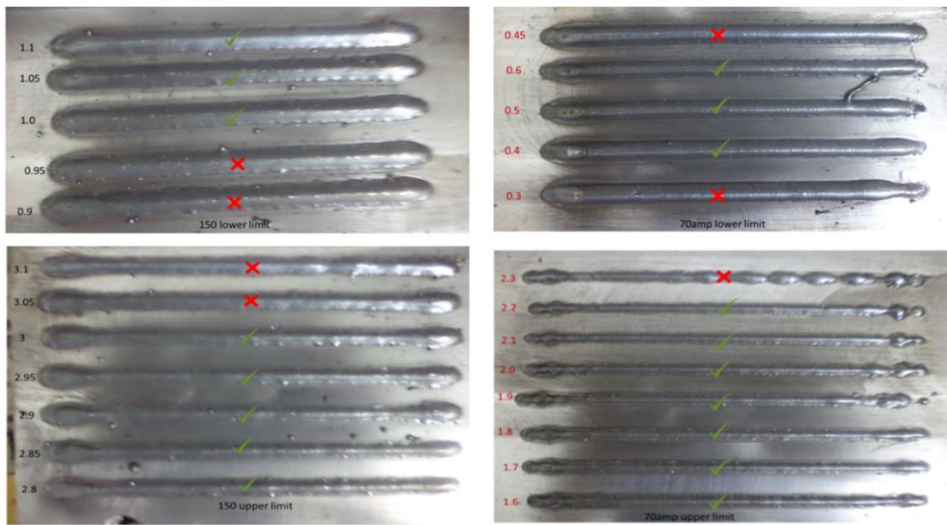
Some sample weld-bead illustrating the selection of suitable weld beads based on geometry and continuity in bead.
